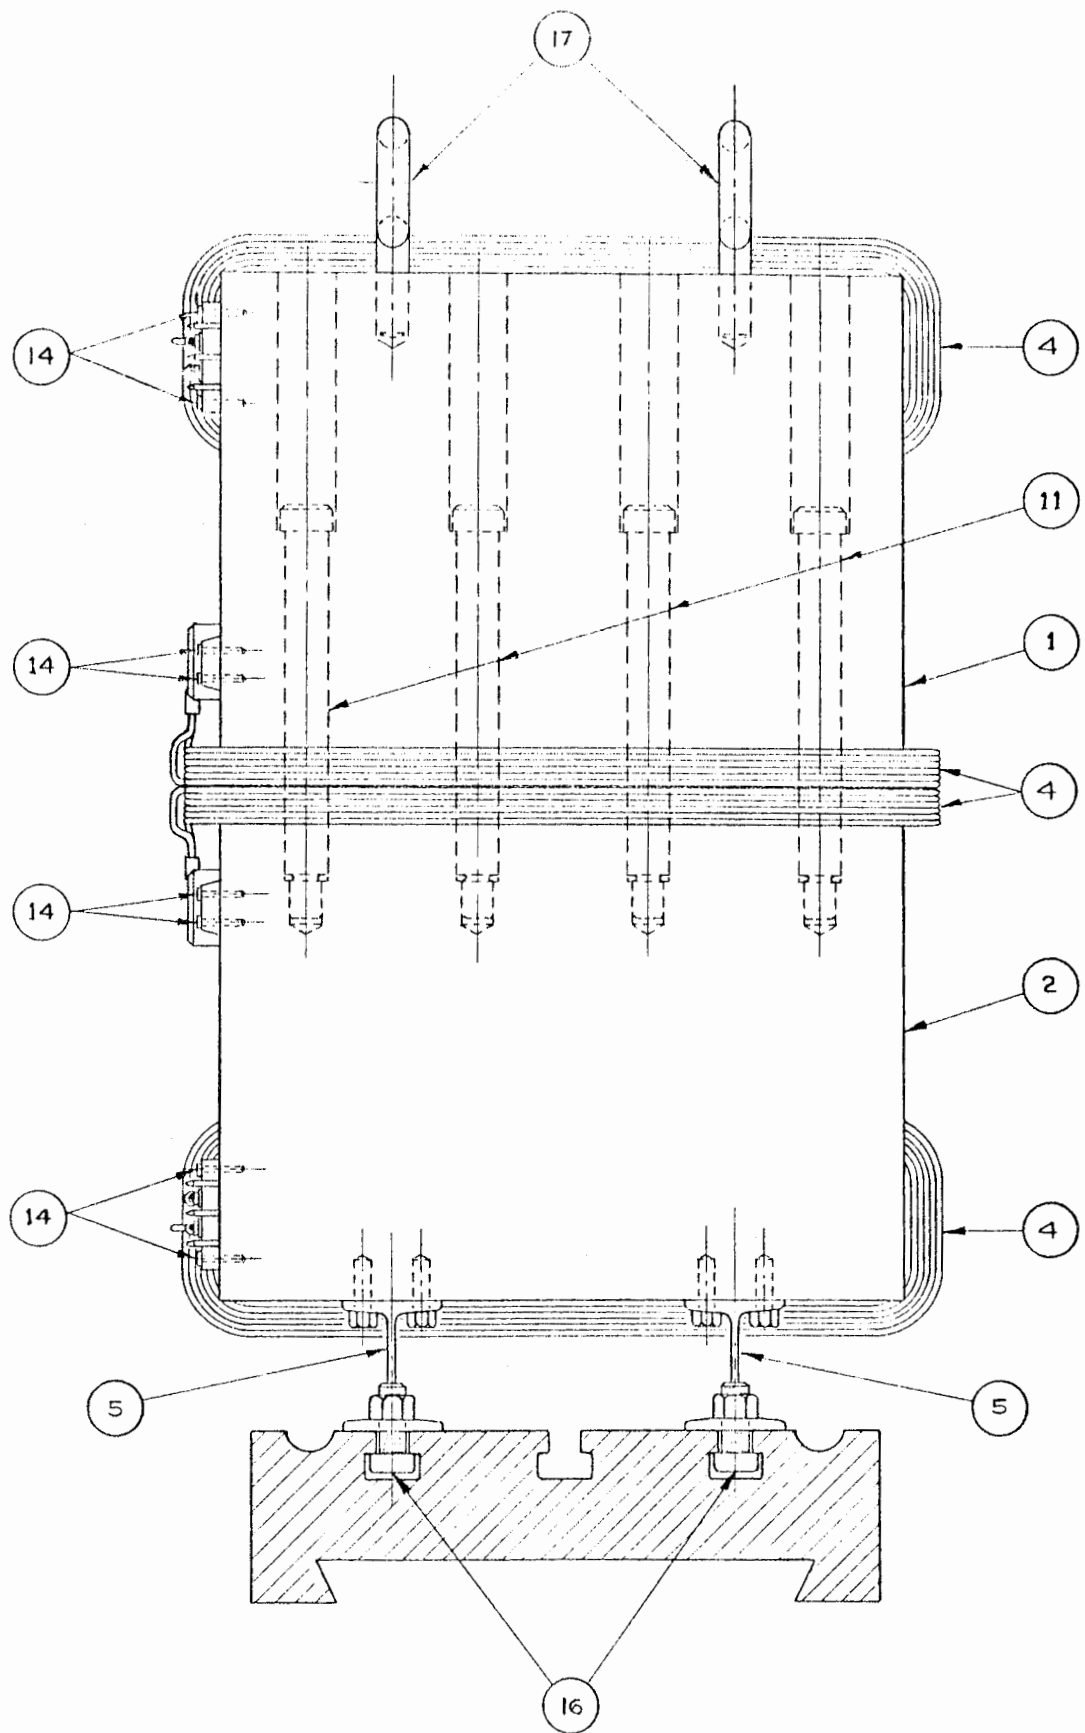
Assembly of magnetic collimator (Sheet 2 of 2).
